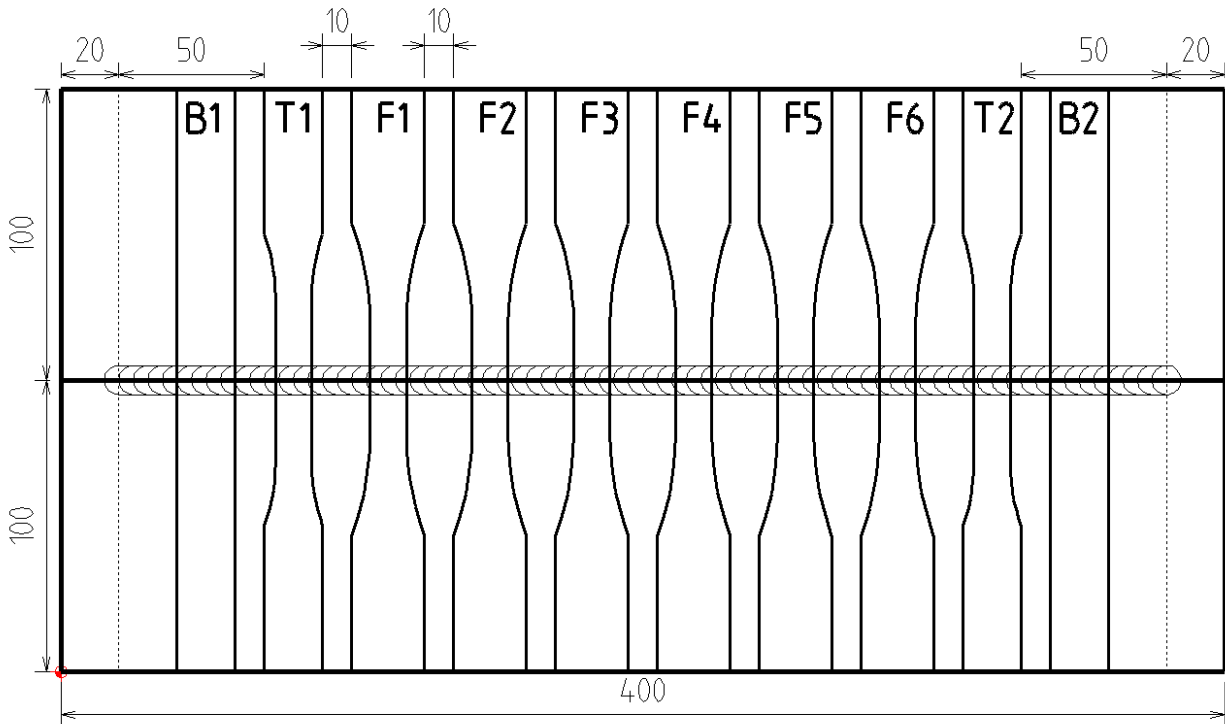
Drawing of the welded joint and specimen layout (B1 and B2: Bending specimens, T1 and T2: Tensile specimens, F1 to F6: Fatigue specimens, dimensions in mm)
